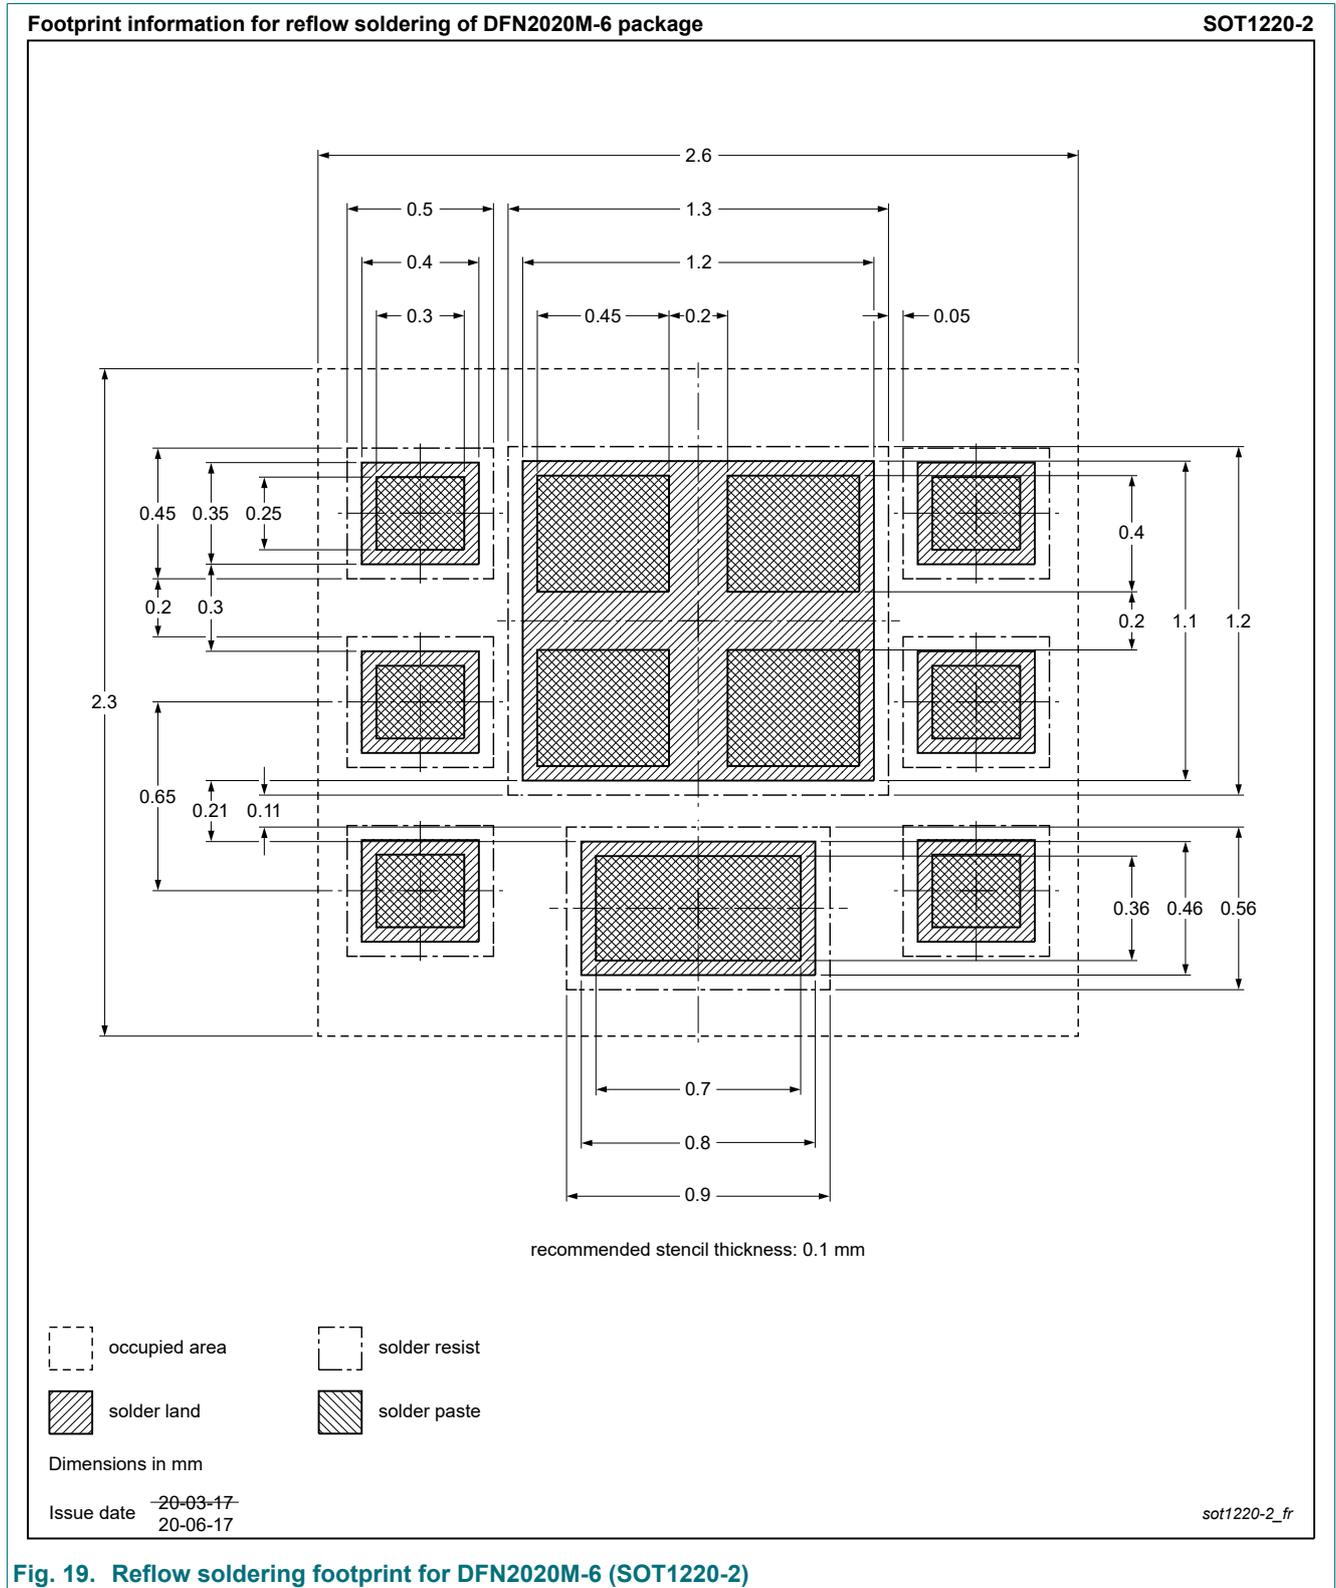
Reflow soldering footprint for DFN2020M-6 (SOT1220-2)
